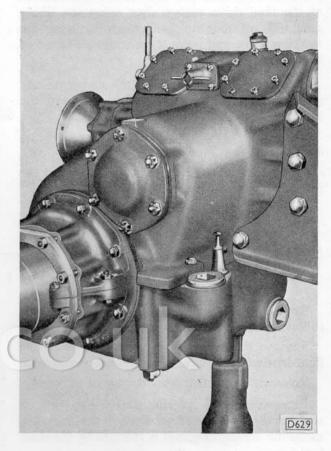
Method of supporting bottom half of final drive casing whilst removing torque arm.
